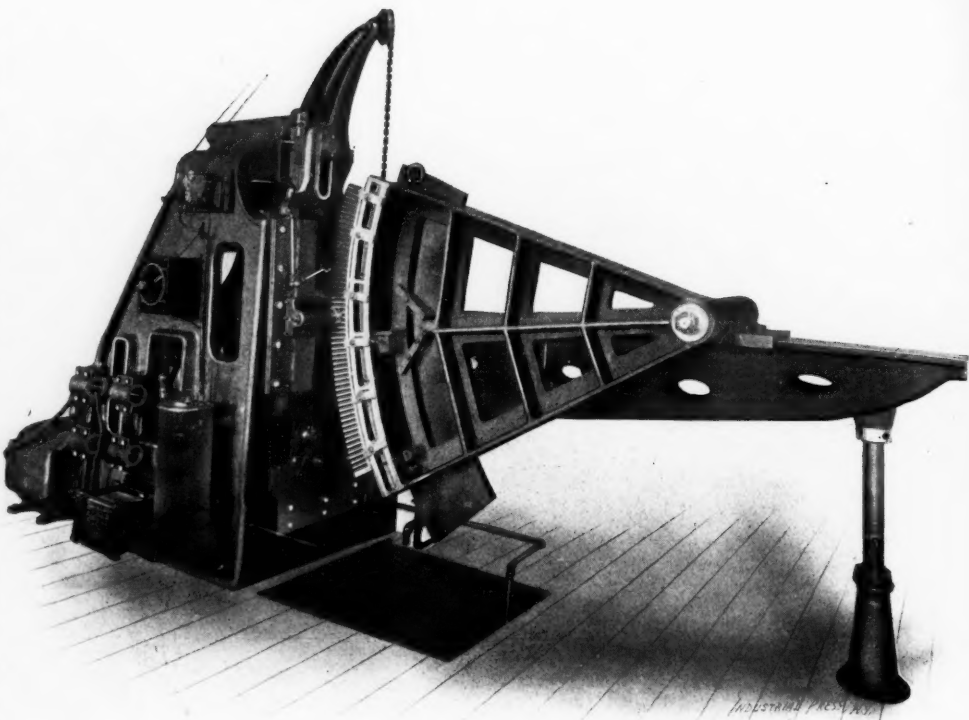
Riddell Bucket Cutter at work on a Steel Segment, Cutting Buckets out of Solid Stock.
